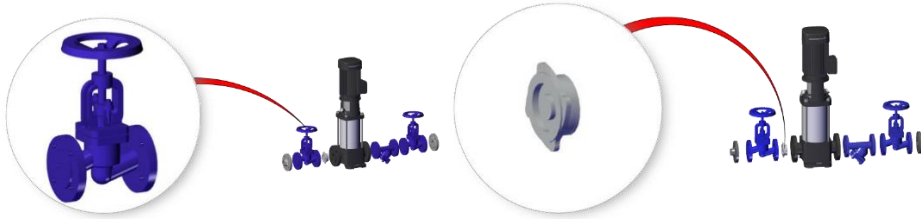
Pump Inlet-Outlet Valves Figure Ap. 4.21.2 Pump Check Outlet Valve
